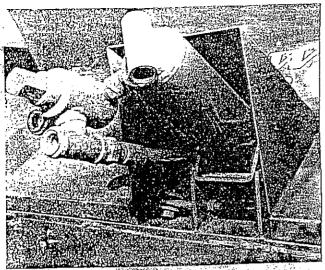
HYDRAULIC CYLINDER FOR DOOR
